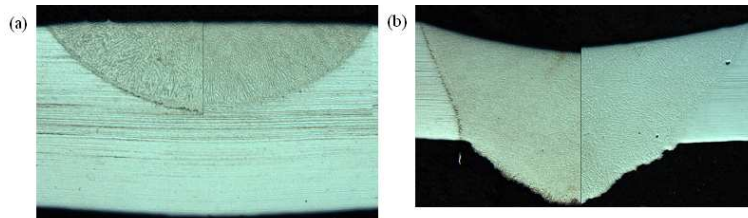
Weld pool shapes for bead on plate welds on 2mm thick 316L stainless steel at (a) 80 A and (b) 120 A. The left hand side of each image shows welds made on a sample with a natural oxide layer, whilst the right hand sides show welds made on cleaned surfaces.
